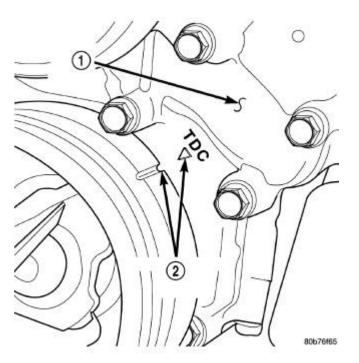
Engine Top Dead Center (TDC) Indicator Mark Courtesy of CHRYSLER LLC
